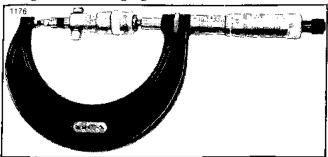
C-69. Adjust Micrometers To Read The Same MEASURING CYLINDER AND PISTON
